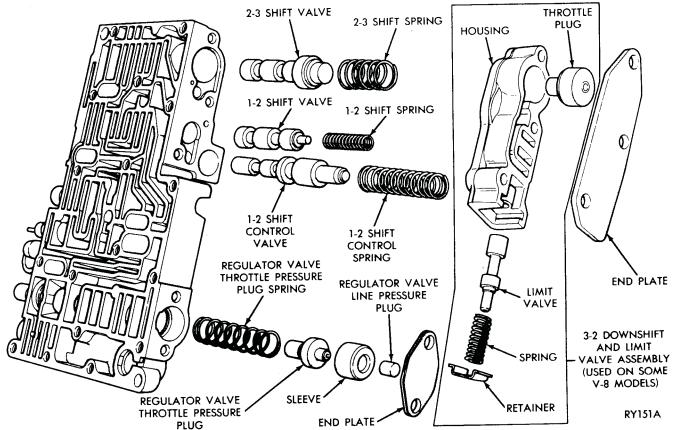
Shift Valves and Pressure Regulator Valve Plugs
